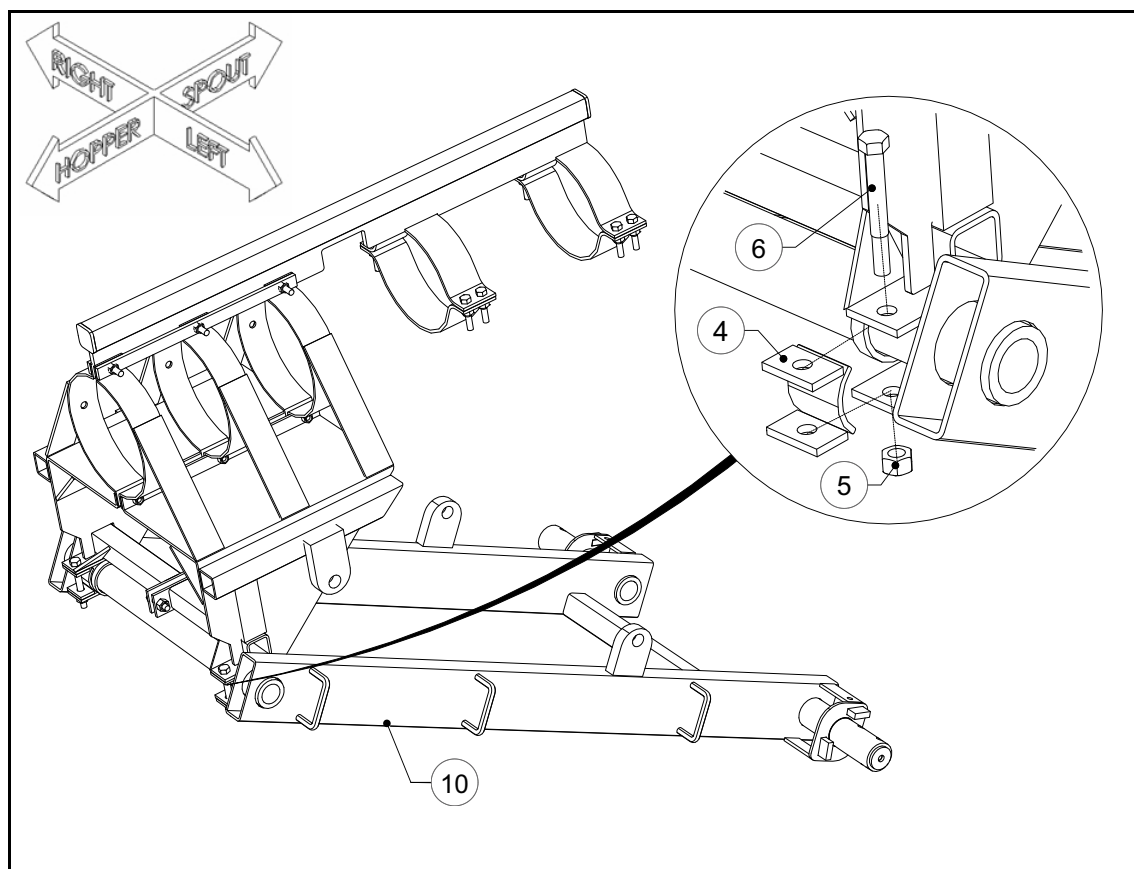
Attaching Cam-Lift to the Wheel Base
